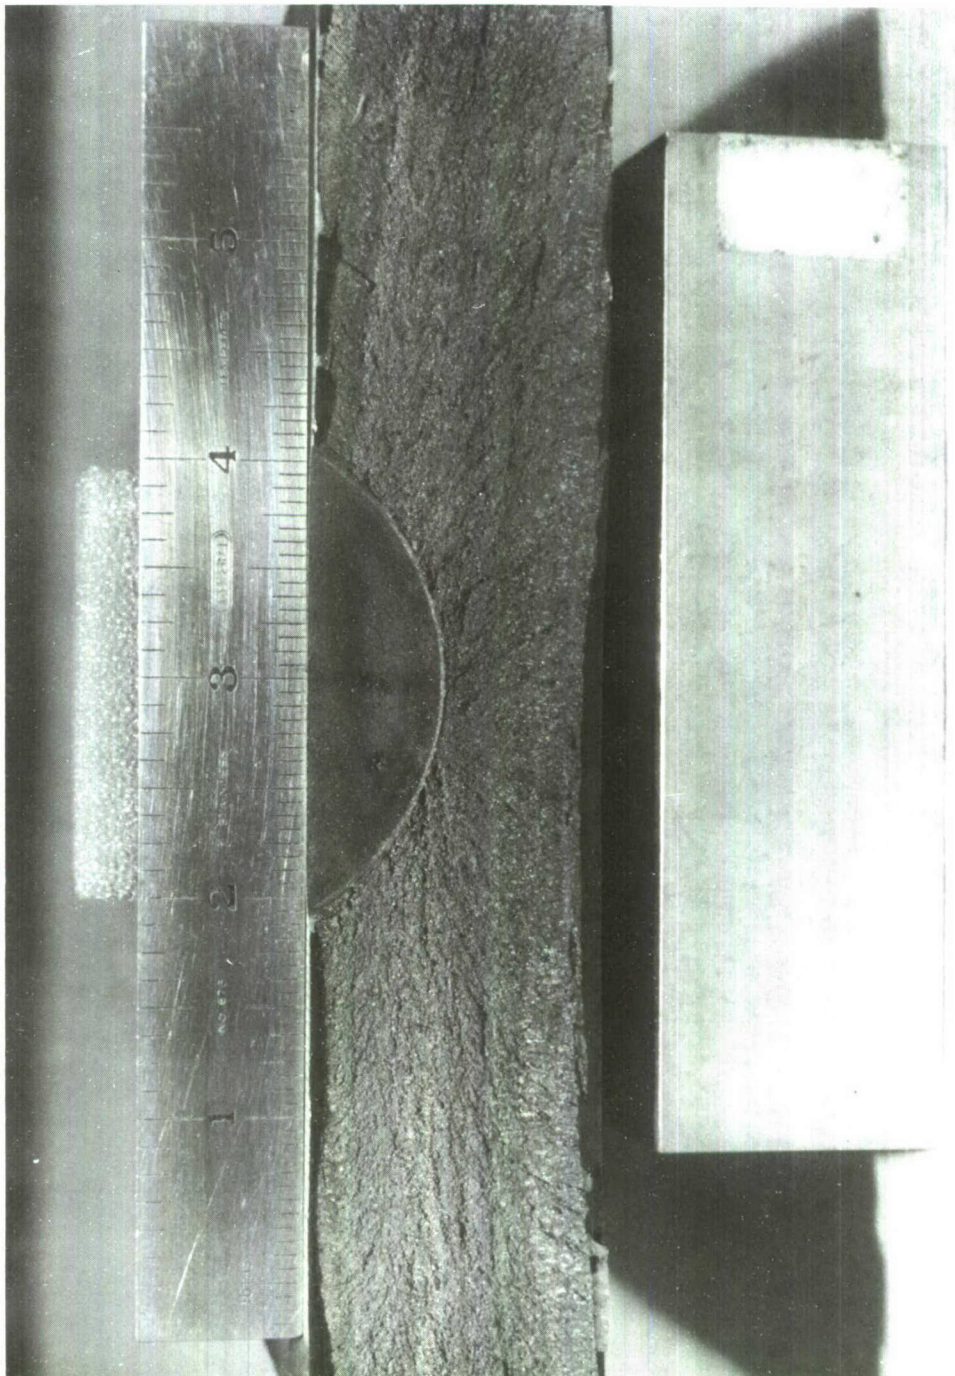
Flaw Shape EDM'd into Surface Flaw Specimen
